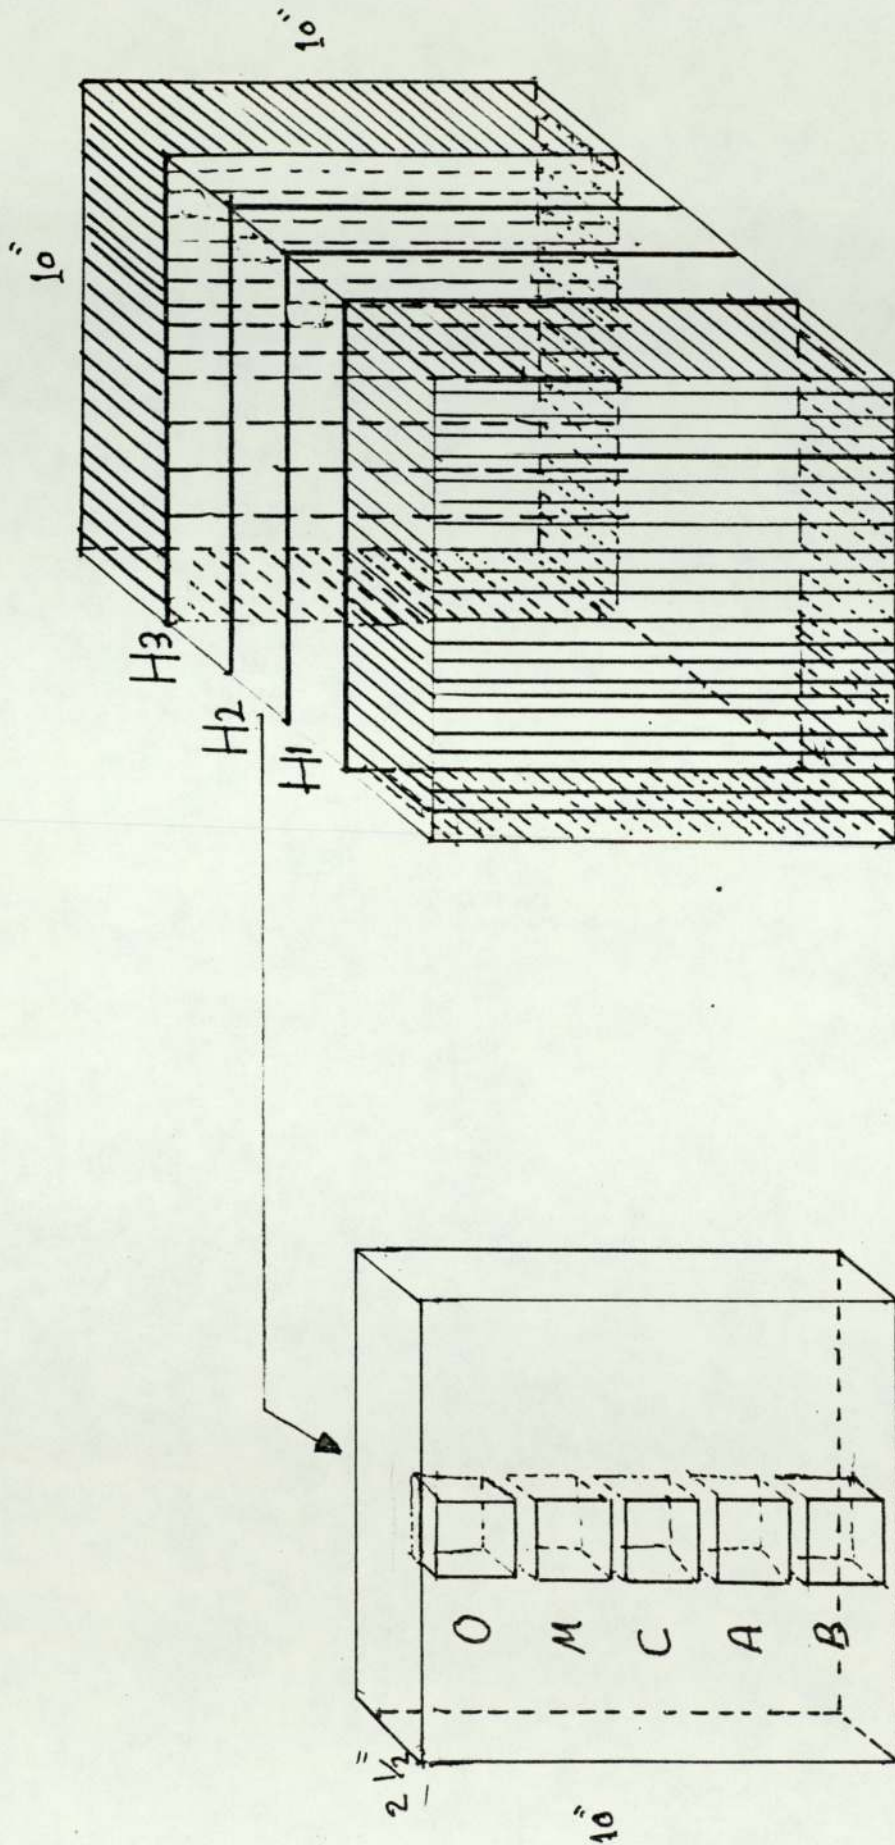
Schematic plan of work for 'Hydie' Steel/Short Bar.
